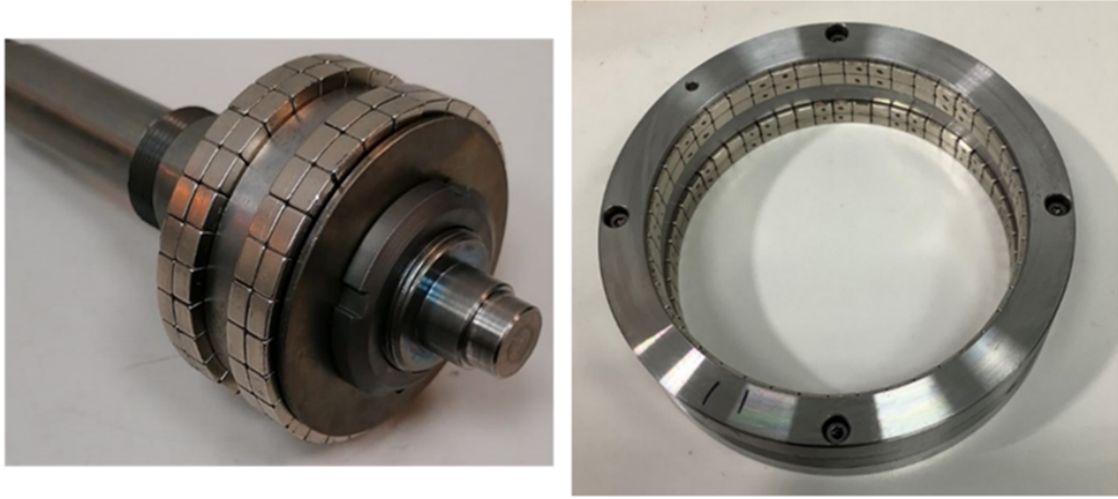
Assembly of the inner (left) and outer (right) rotors of the PMG
